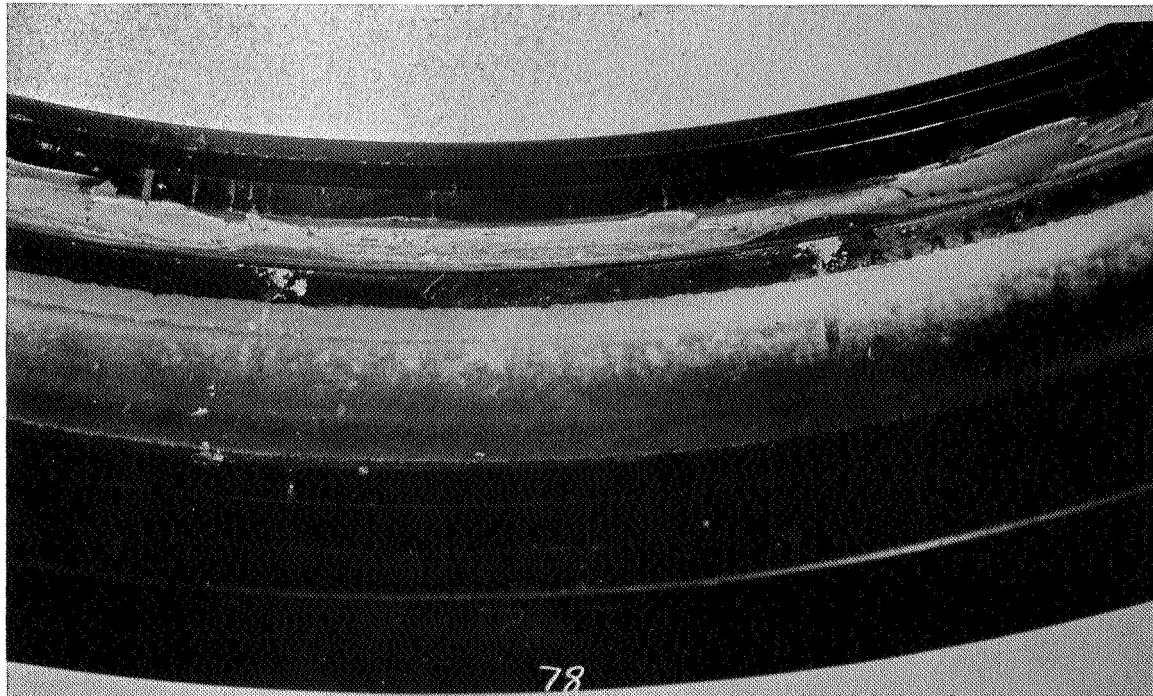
BEARING S/N 78. DAMACED OUTER RING.
